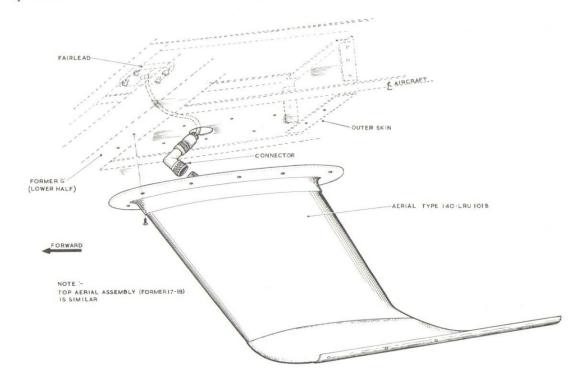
Assembly of A.R.I. 18124/1 aerial
